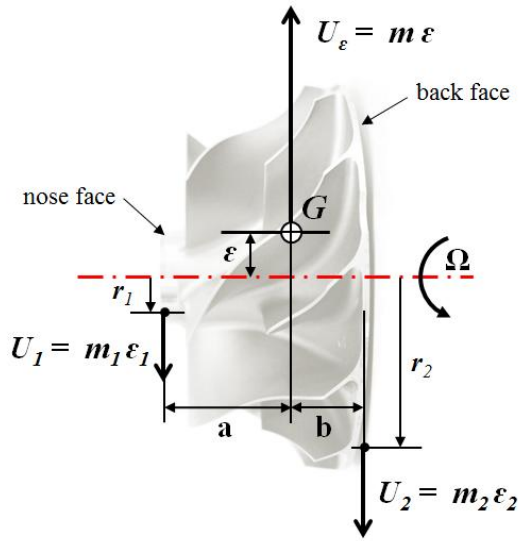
Two-plane low-speed balancing of the compressor wheel
